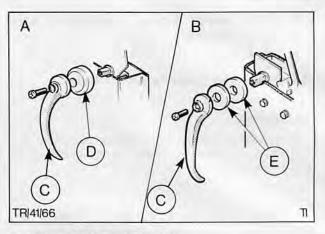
Interior handle assemblies A - Without trim panels D - Escutcheon E - Washers B - With trim panels C - Handle
